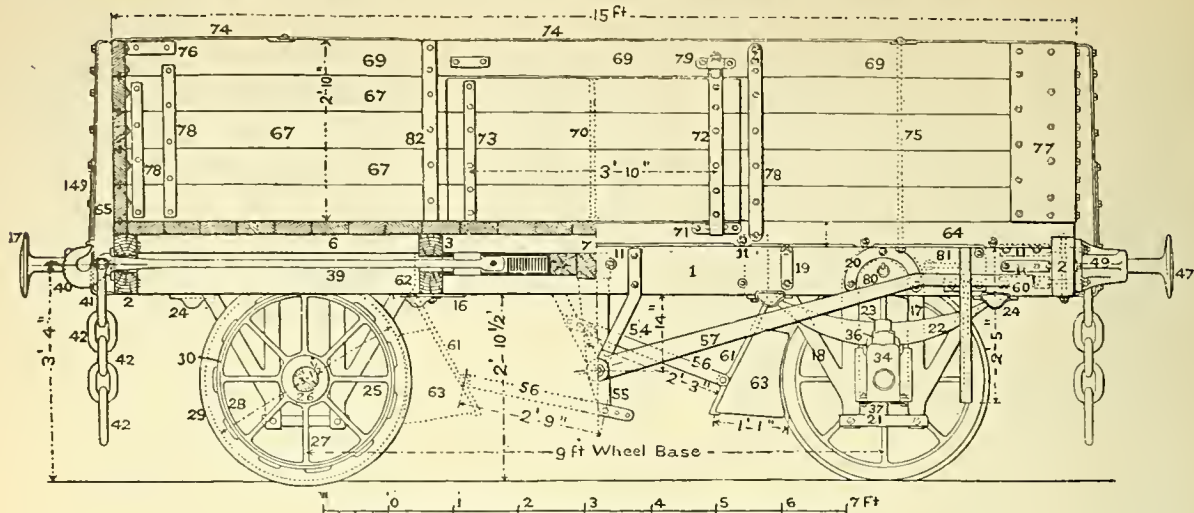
Half Longitudinal Section and Half Side Elevation.
